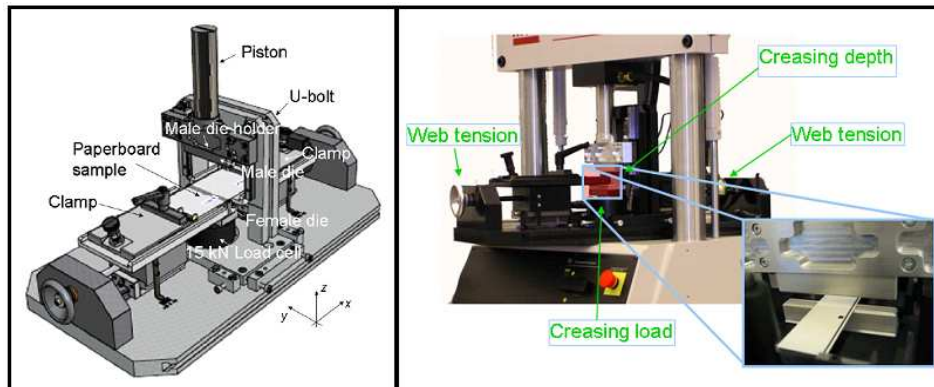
The laboratory creasing tool setup unit. Left: 3D-CAD [2], Right: Photography [5]
